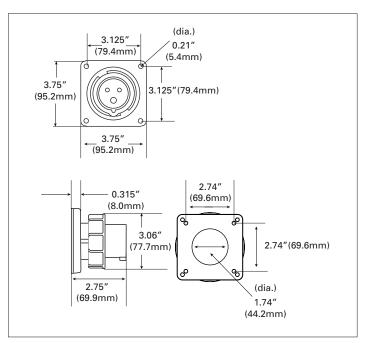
16A 3-P, 4-W Front, Side & Back View Inlets
